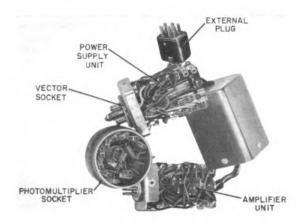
Subassemblies Which Go to Make Up the Complete Counter of Fig. 6-16. Courtesy of Radio & Television News.
